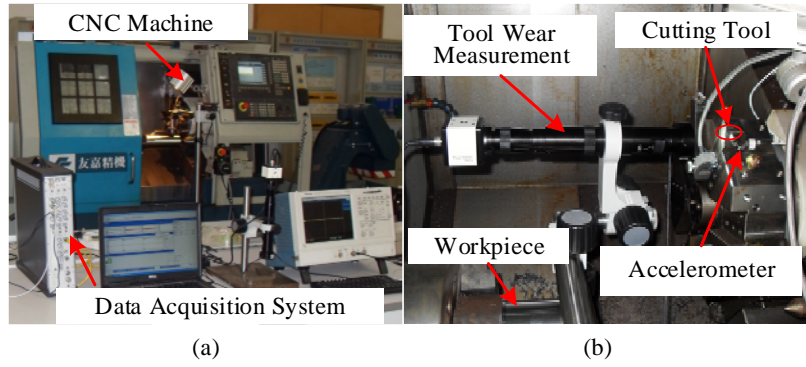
CNC machine system for tool wear testing. (a) CNC machine and data acquisition system. (b) Tool wear monitoring system.
